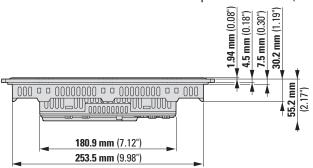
Dimensions for 10.1" rear (panel) mounting devices in mm (inches)XV-313-..-..-A00-..
